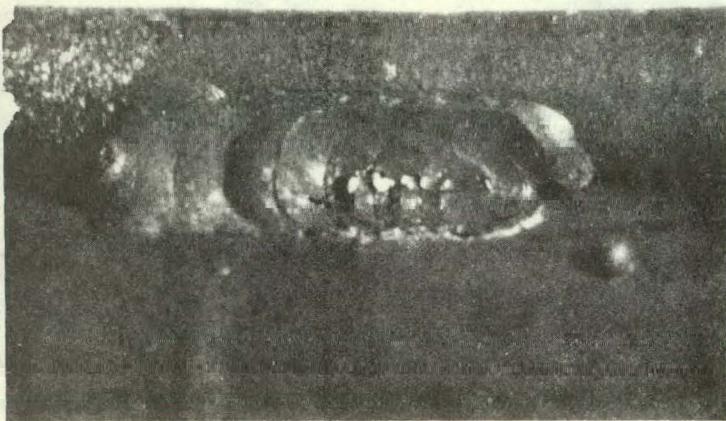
Repaired weld (reweld over original) at Inspection D.
